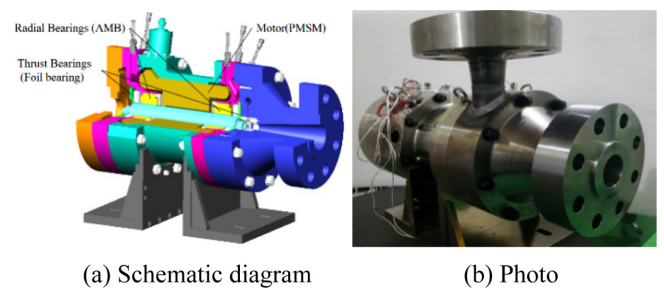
$s\text{CO}_2$ Compressor supported by magnetic bearings
